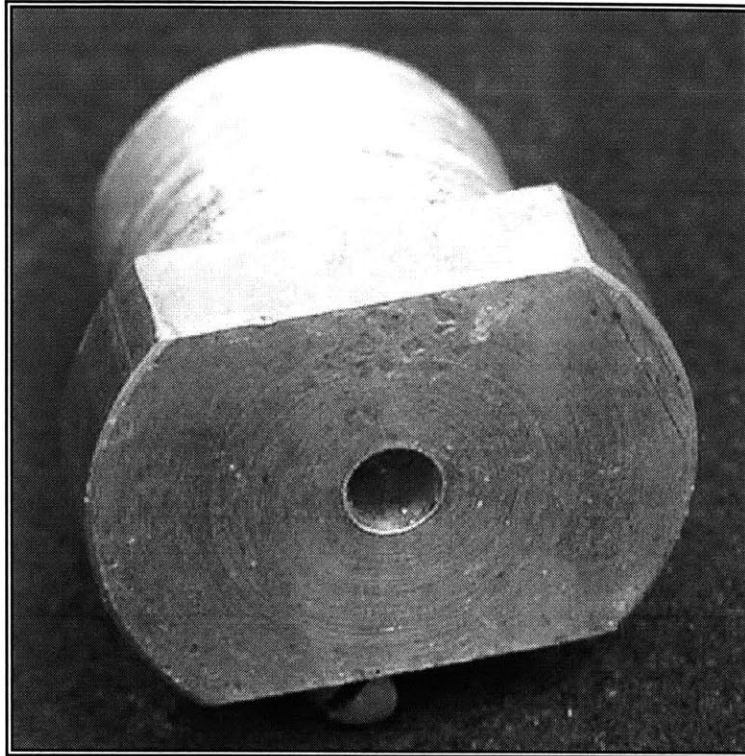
The exit hole in the die contains a 0.020-inch inner hole that sets the ultimate diameter of the wire
